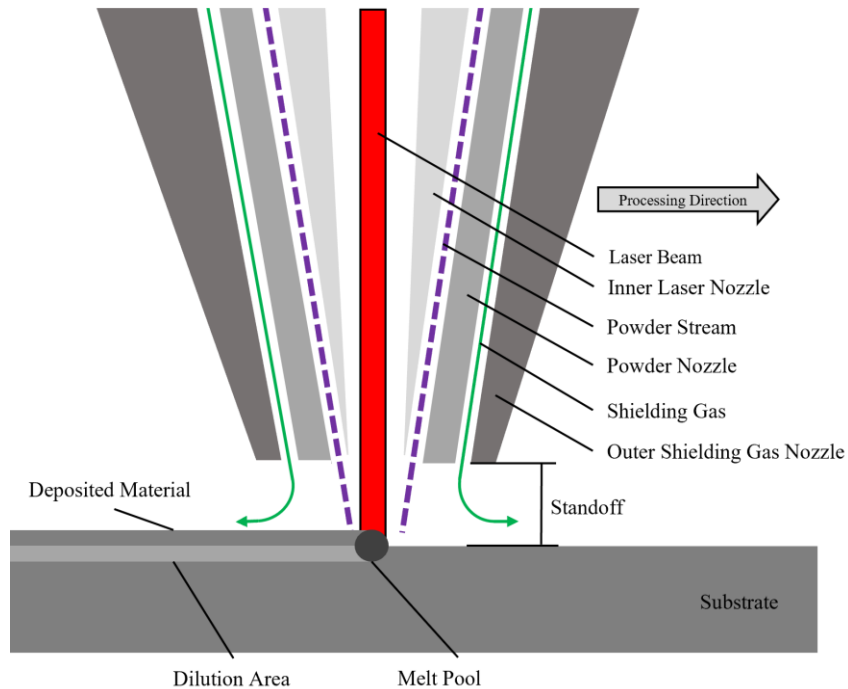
Blown powder coaxial DED nozzle assembly diagram
